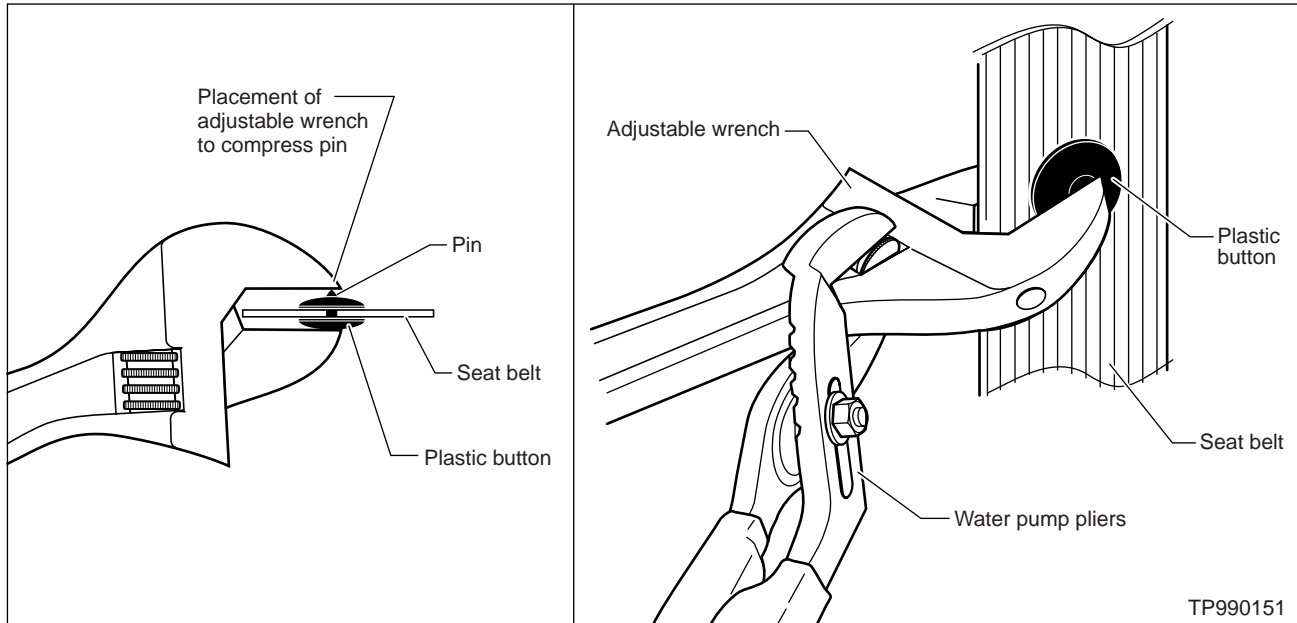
Using wrench and pliers to compress the latch plate retaining button
